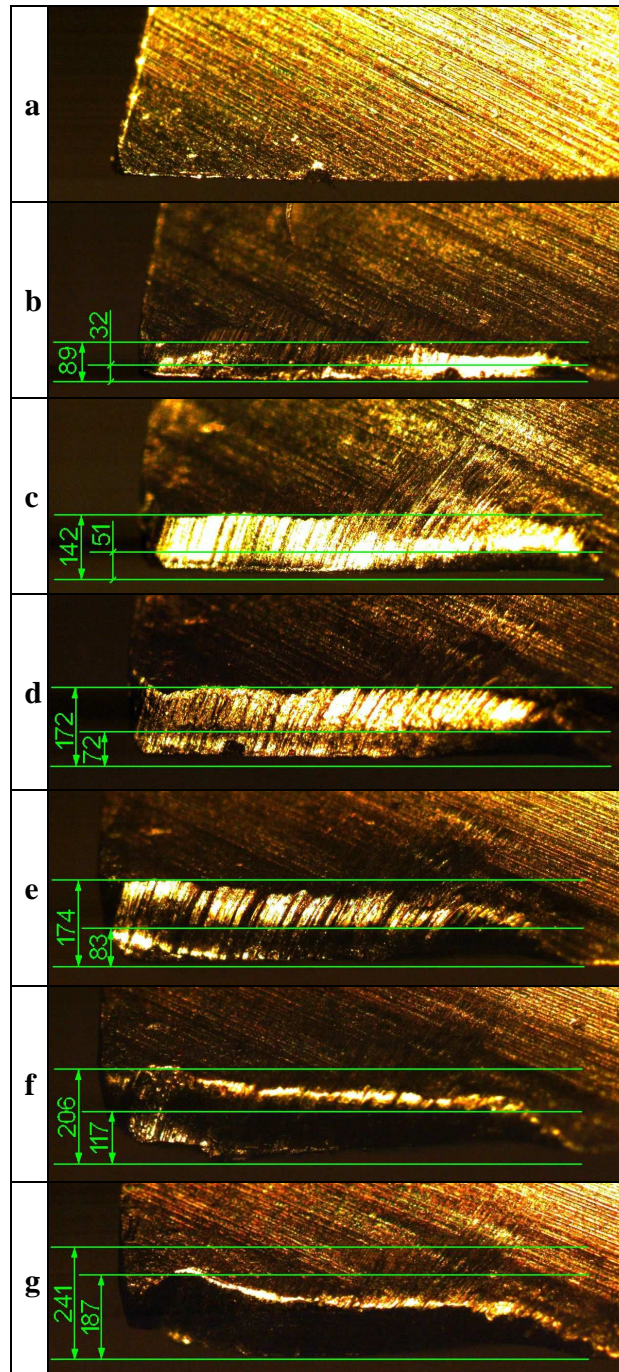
MTE 9mm end mill tooth # 4 trochoidal toolpath rake face wear a) Fresh tool, b-g) After pass 1-6 (each 54 mm length, 27 mm width, 1 mm depth).
